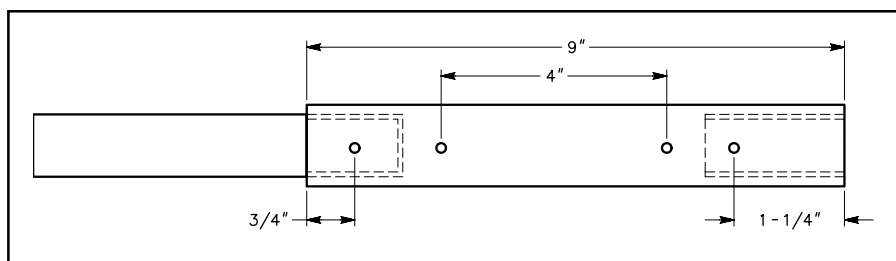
Coil-form hole locations. The 40-meter form is shown; the 80-meter form is similar except that it is 11 inches long and the holes for the coil are 6.3 inches apart.
